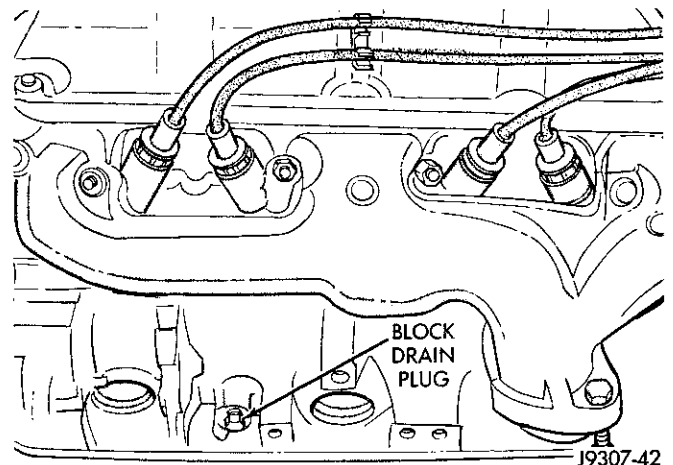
Drain Plugs—Gas Powered Engines—Typical
